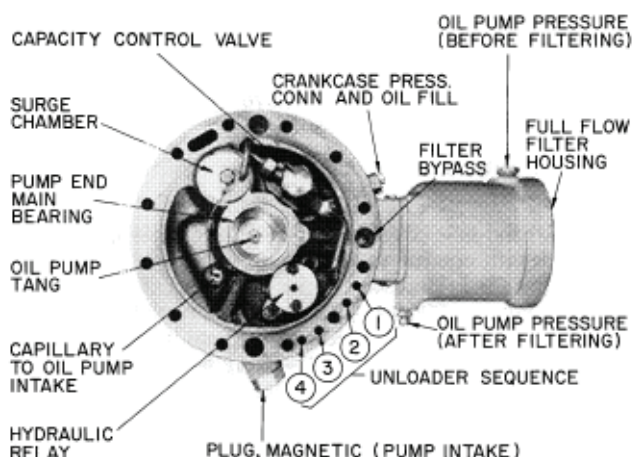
5H120 and 126 Pump-End Bearing Head
